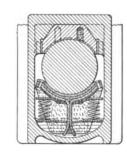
Sectional Drawing of the Journal and Lubricating Device
